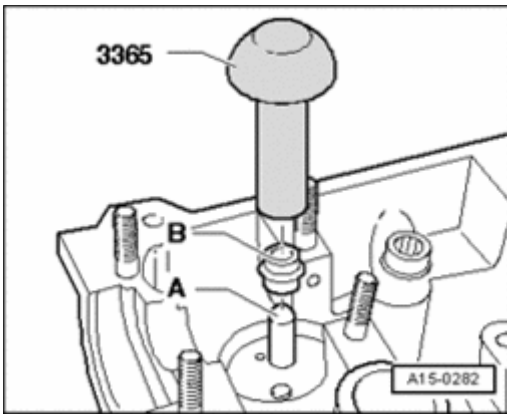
Identifying Plastic Sleeve, Valve Stem Oil Seal & Valve Stem Seal Driver 3365
